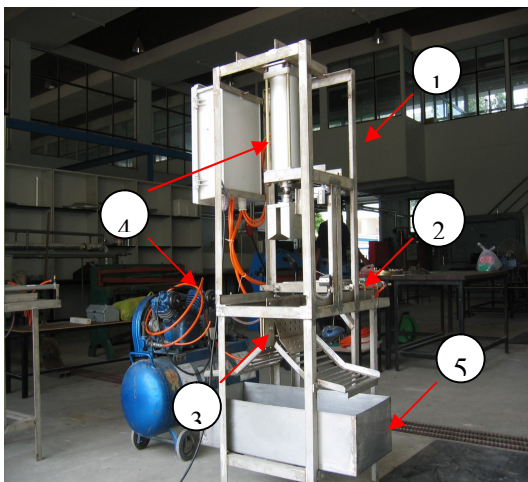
Prototype of the semi-automatic young coconut fruit cutting machine: 1) machine frame; 2) cutting base; 3) knife set; 4) pneumatic system; 5) tank
